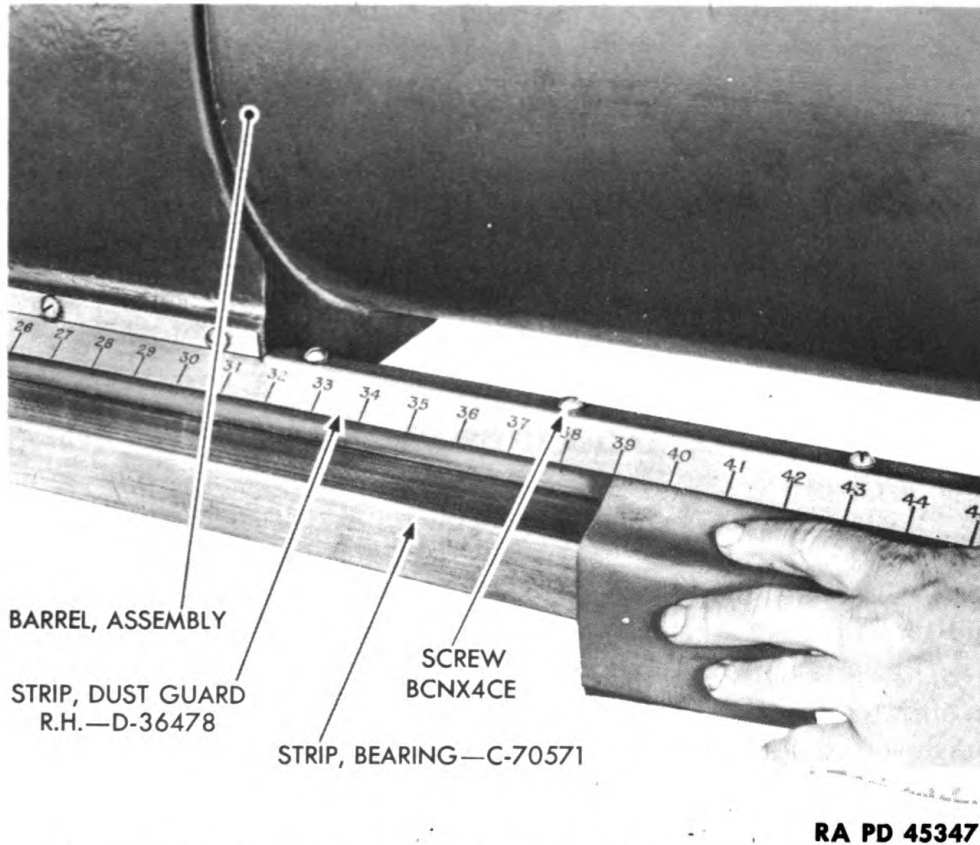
Repairing Bruised Bearing Strip (8-in. Howitzer)
